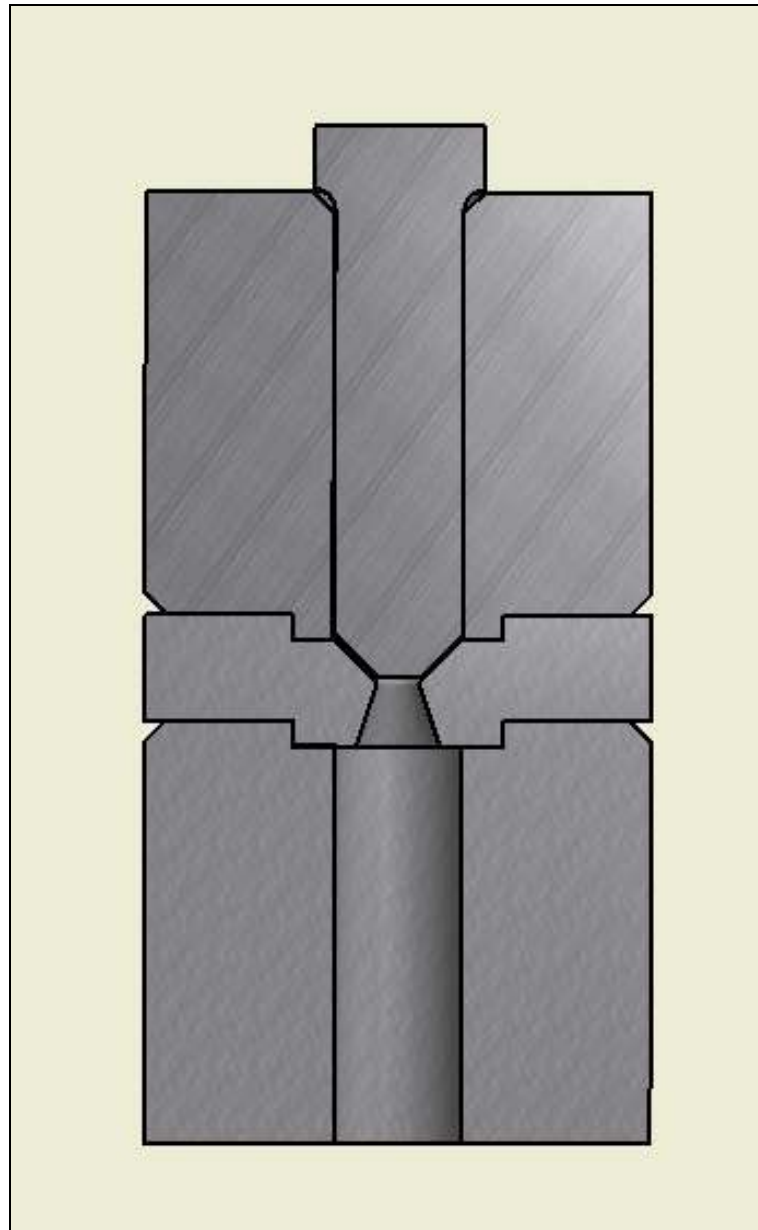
Rendering of a cross section of the extrusion assembly.
